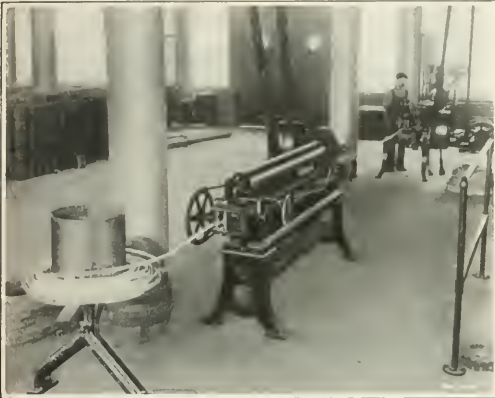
Patented Straightening Machine designed for Use on Flat Stock
